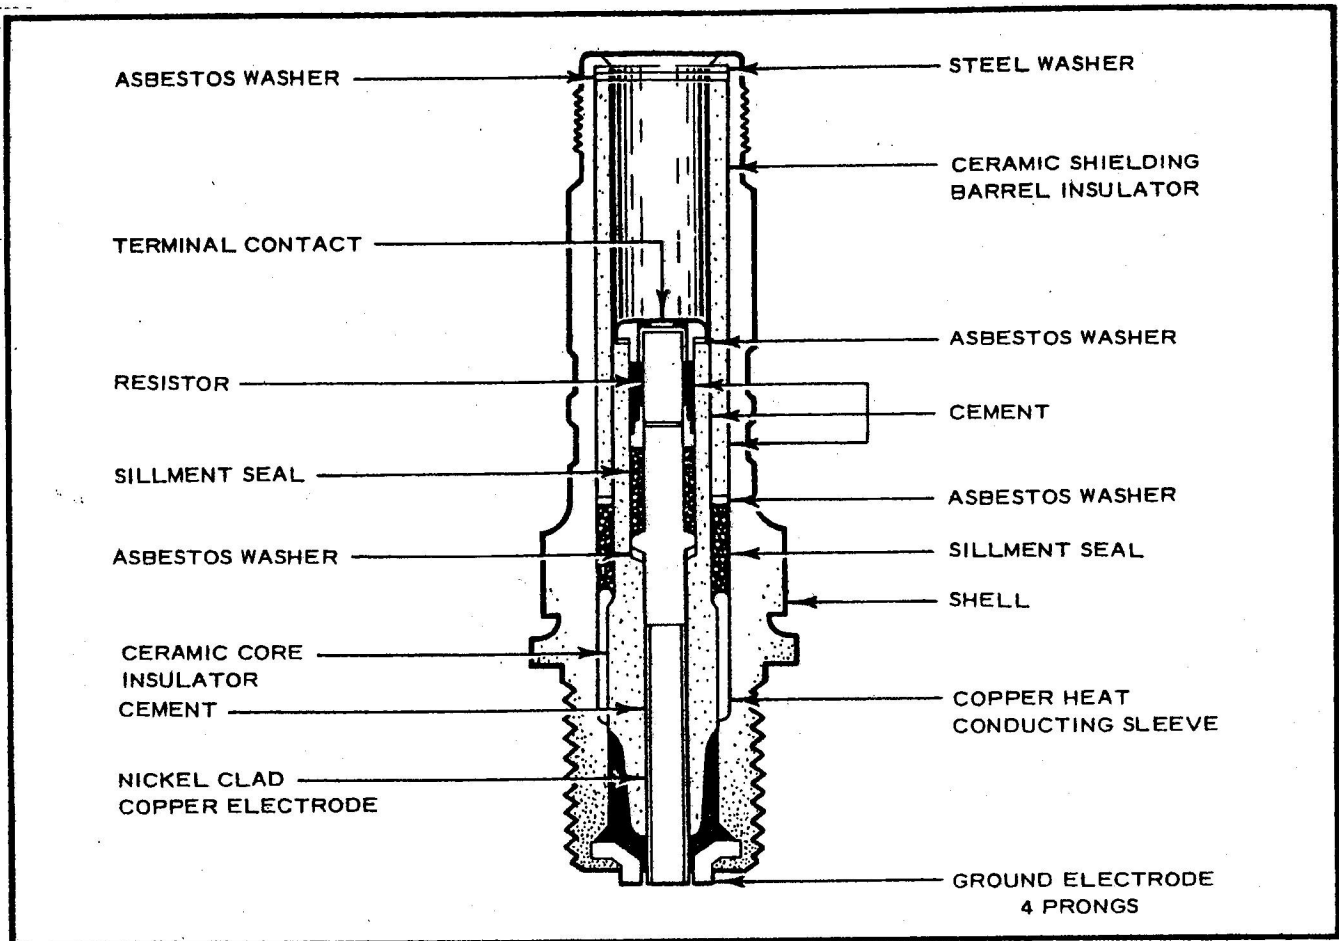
Sectional View of Champion Spark Plug Type REB37N
